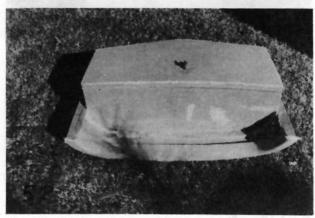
Tank bottom with tee installed. Note groove routed in foam for instrument panel.
